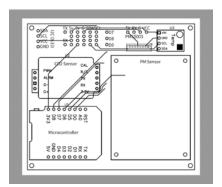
Schematic capture of the designed PCB for the air quality monitor. WithEasyEDA a web-based PCB design tool.
